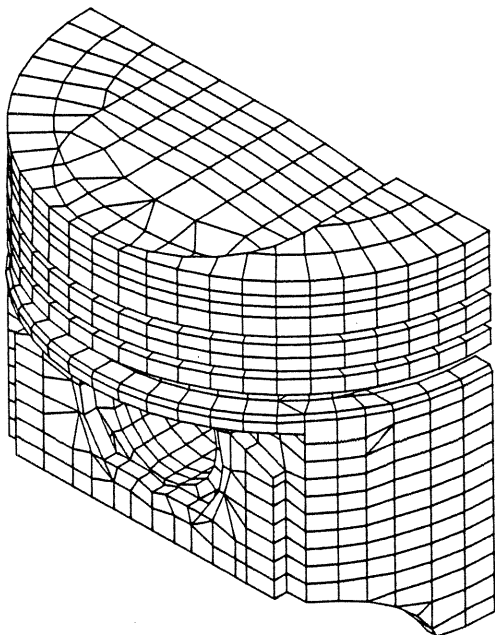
Half model of piston: orthographic view showing piston crown, ring lands/grooves and skirt.
